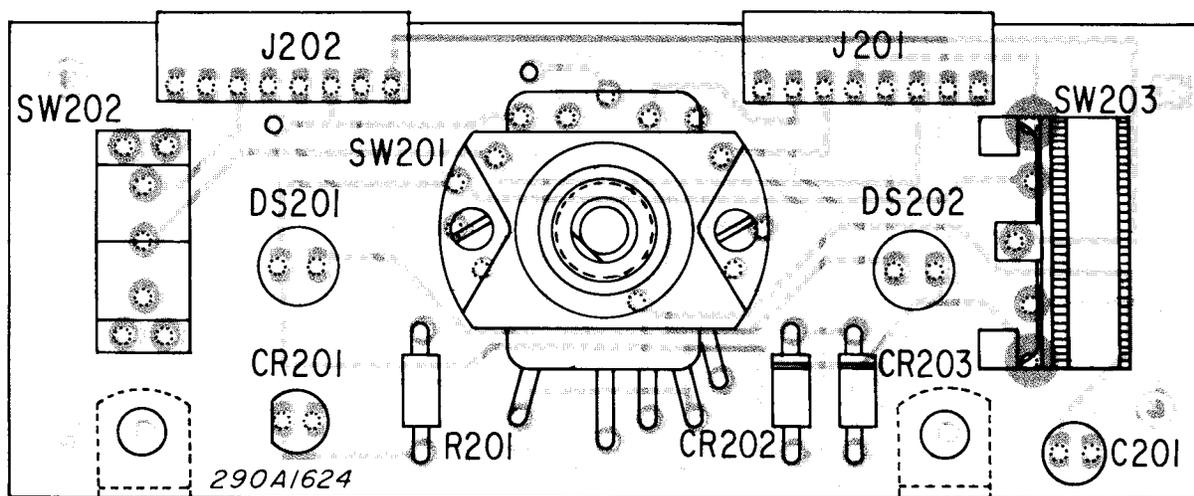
Siren Module Front Circuit Board Parts Location Diagram
